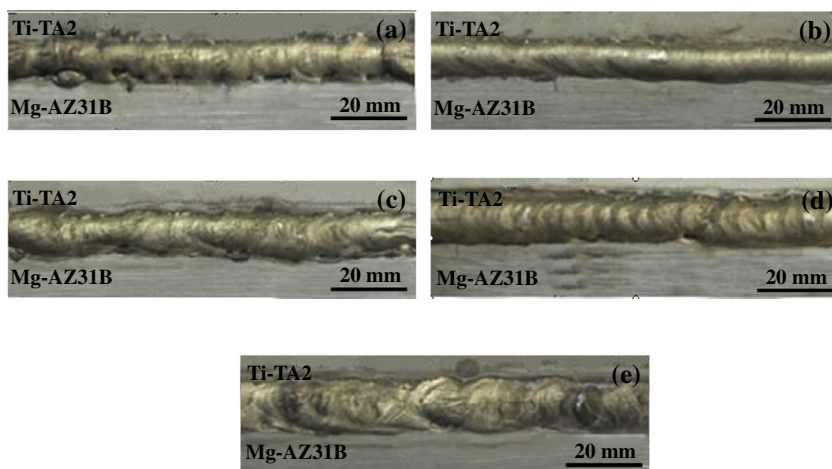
Effects of welding voltage on weld appearance for Mg–Ti joint (top Mg sheet–bottom Ti sheet): (a) welding voltage of 10 V, (b) welding voltage of 13 V, (c) welding voltage of 15 V, (d) welding voltage of 17 V, and (e) welding voltage of 19 V.
